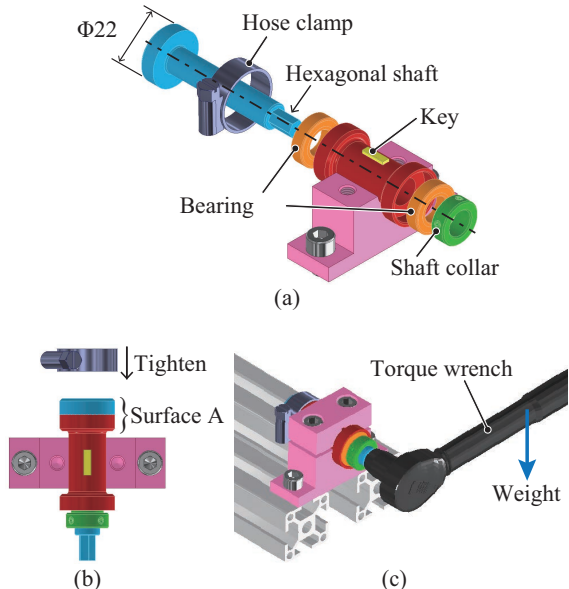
Experimental setup. (a) Exploded view. (b) Top view. (c) Arrangement during experiment.
